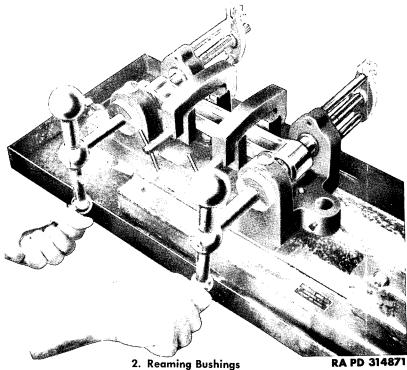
Reaming Articulated Rod Bushings Using Fixture 41-F-2987-425
